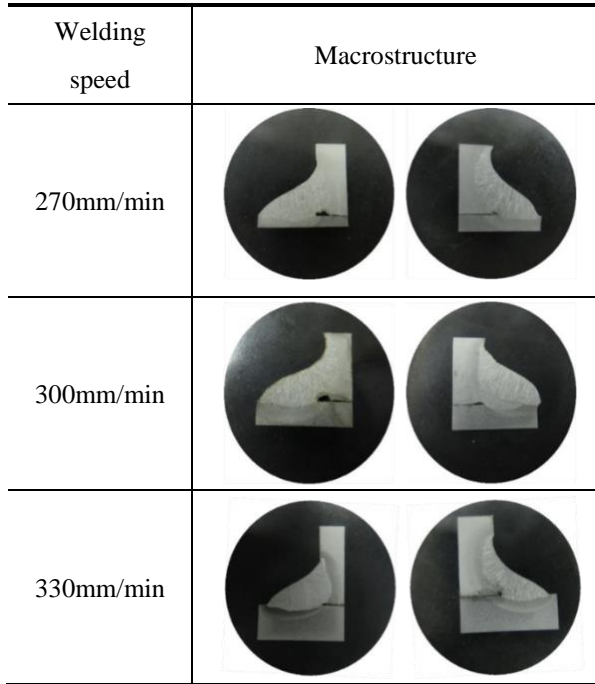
Macrostructures of welded specimens at various welding speed.
